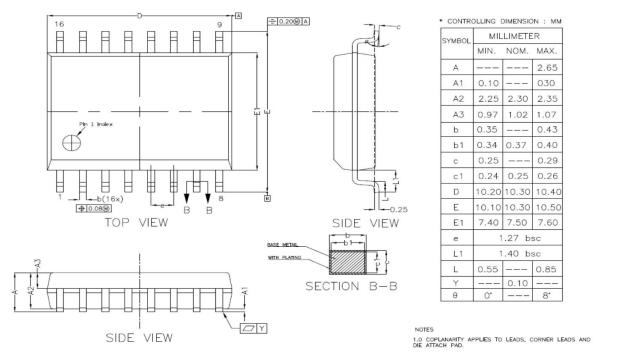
SOW16 Package Shape and Dimension in millimeters
